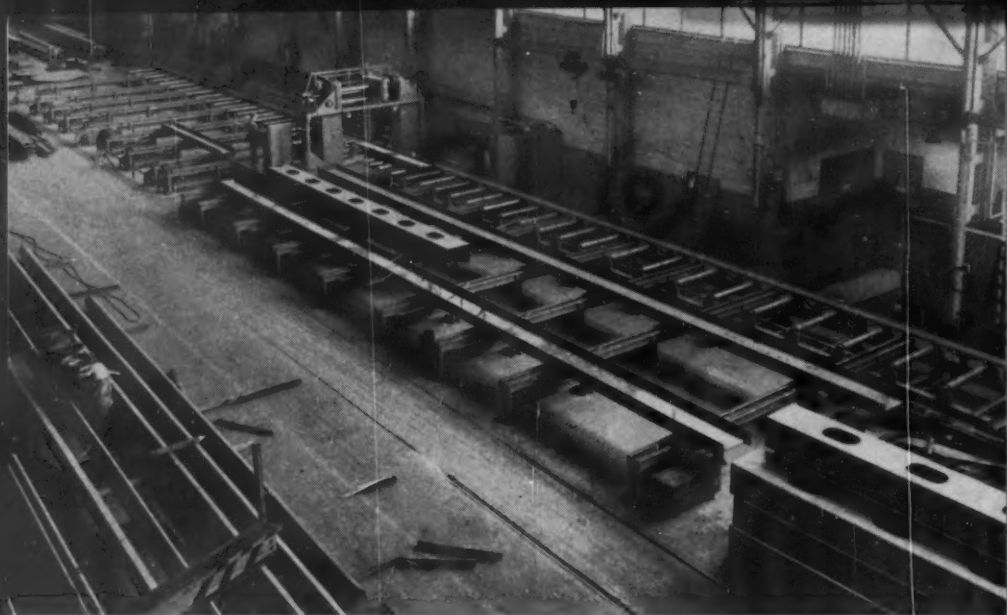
Hill numerically controlled beam and column drilling machine at R. C. Mahon plant.
